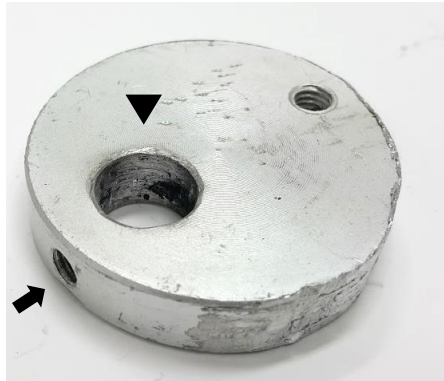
Eccentric piece; a screw hole (arrow) for locking to the flat of axle shaft inserted through the axle shaft hole (arrow head).
